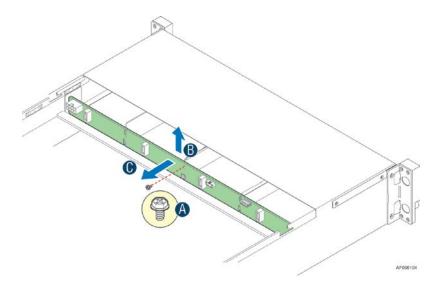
3.5" Drive Hot-Swap Backplane Assembly
